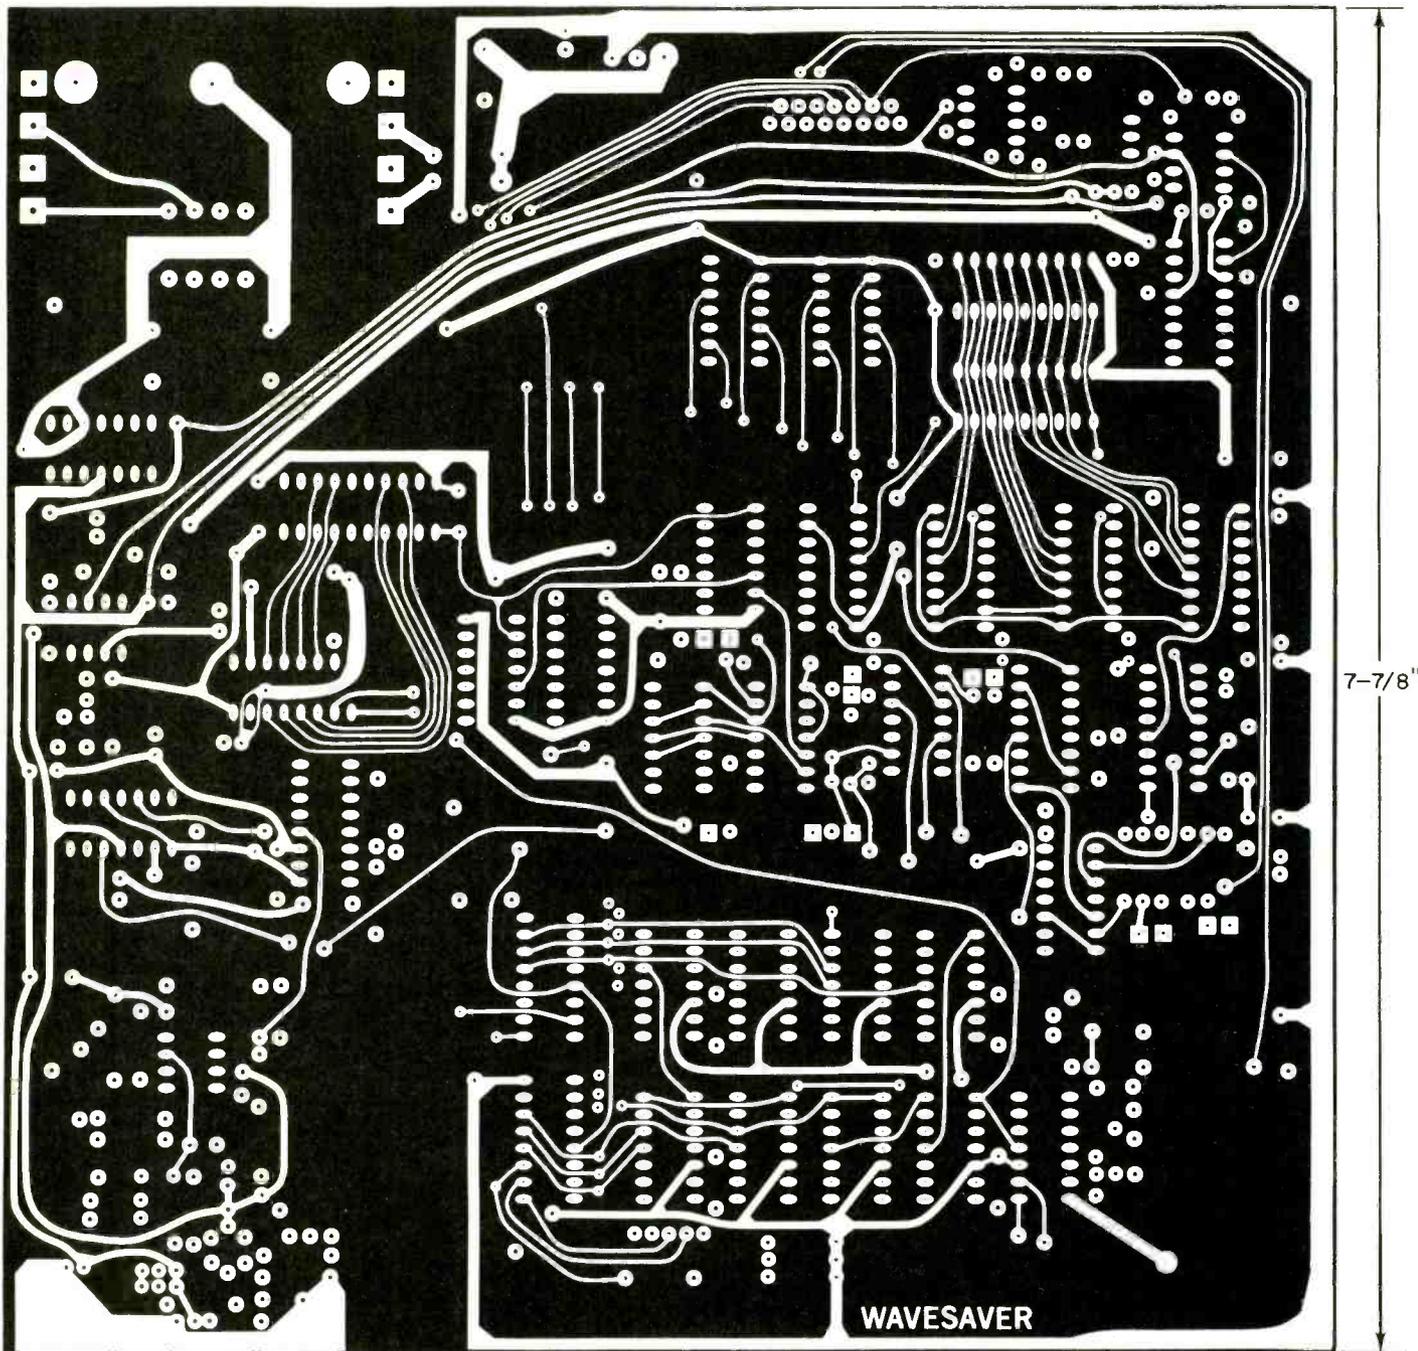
Reduced pattern for foil side of the double-sided pc board. Note correct size.
